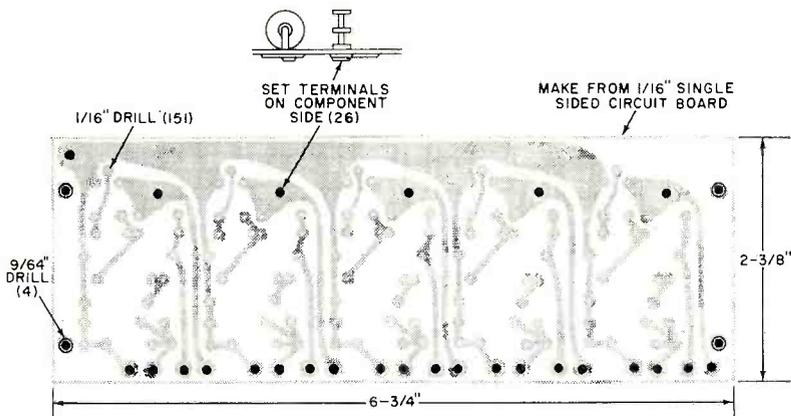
Printed circuit board showing overall dimensions and drill sizes for all holes required.
